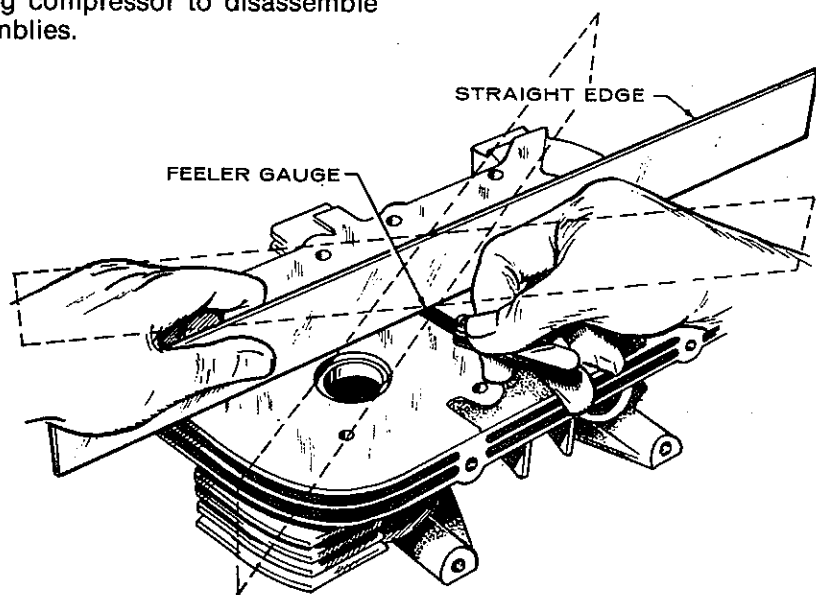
CHECKING CYLINDER HEAD FLATNESS
